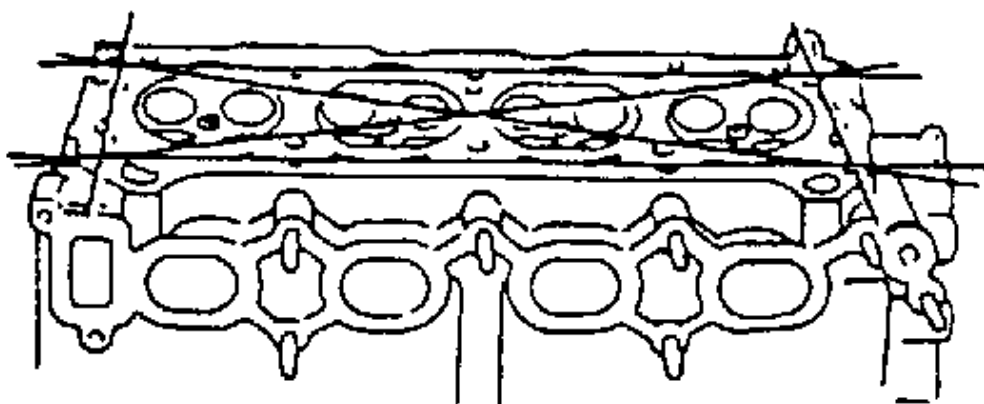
Inspecting Cylinder Head Deck Surface For Flatness
